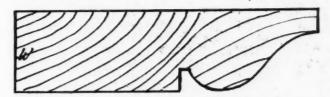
Mark out: Moulding to be Duplicated on end of Strip-View Shows Waste Wood Cut Away
